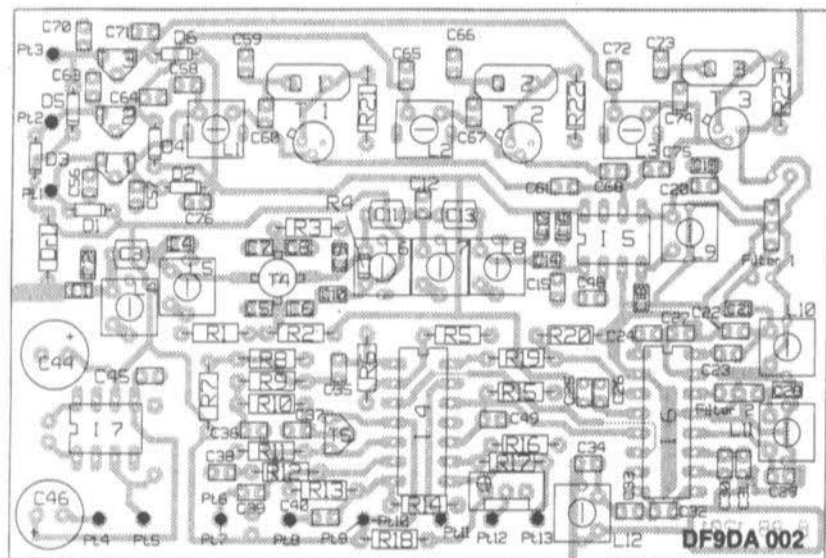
Double-sided printed circuit board of dimensions 111 cm x 74 cm
